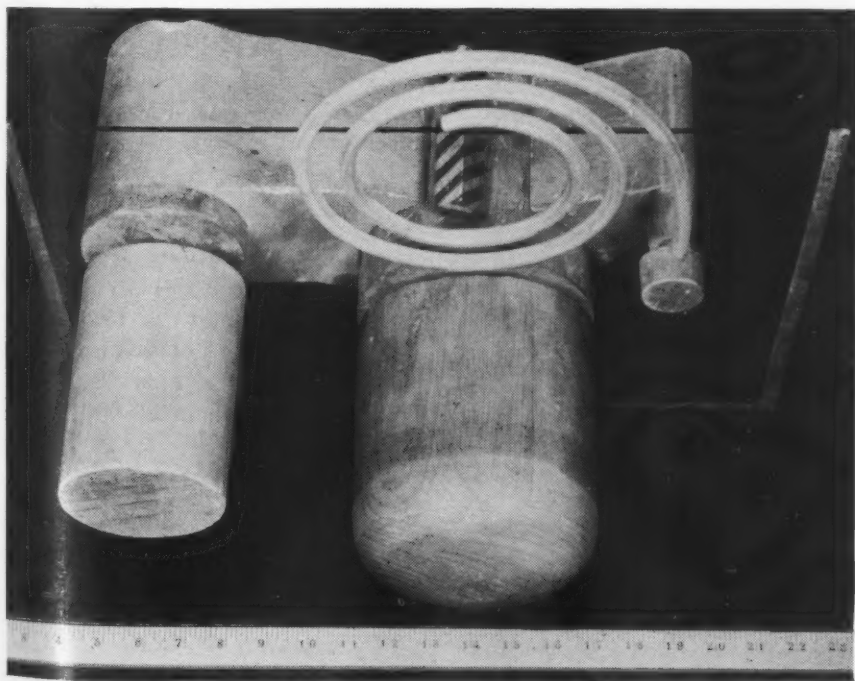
Pattern for Large Fluidity Test Piece Assembled with Parts Separated by Glass Plate.
